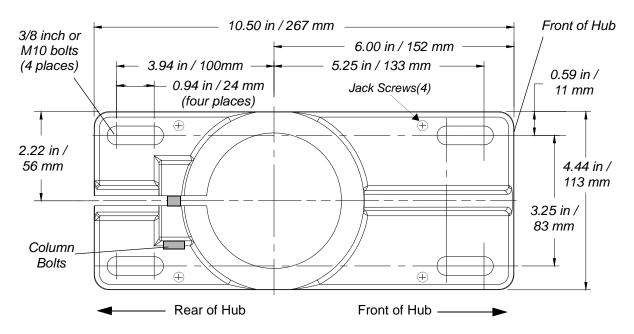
Mounting bolt pattern for the Hub (for Stand on Hub)
